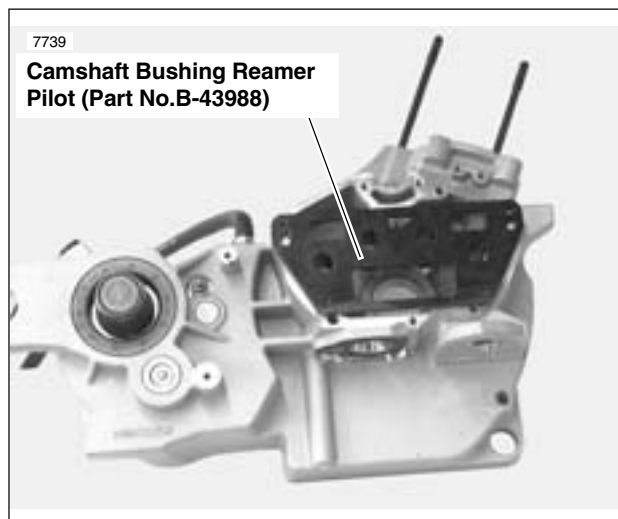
Reaming Cam Gear Bushing in Right Crankcase Half
